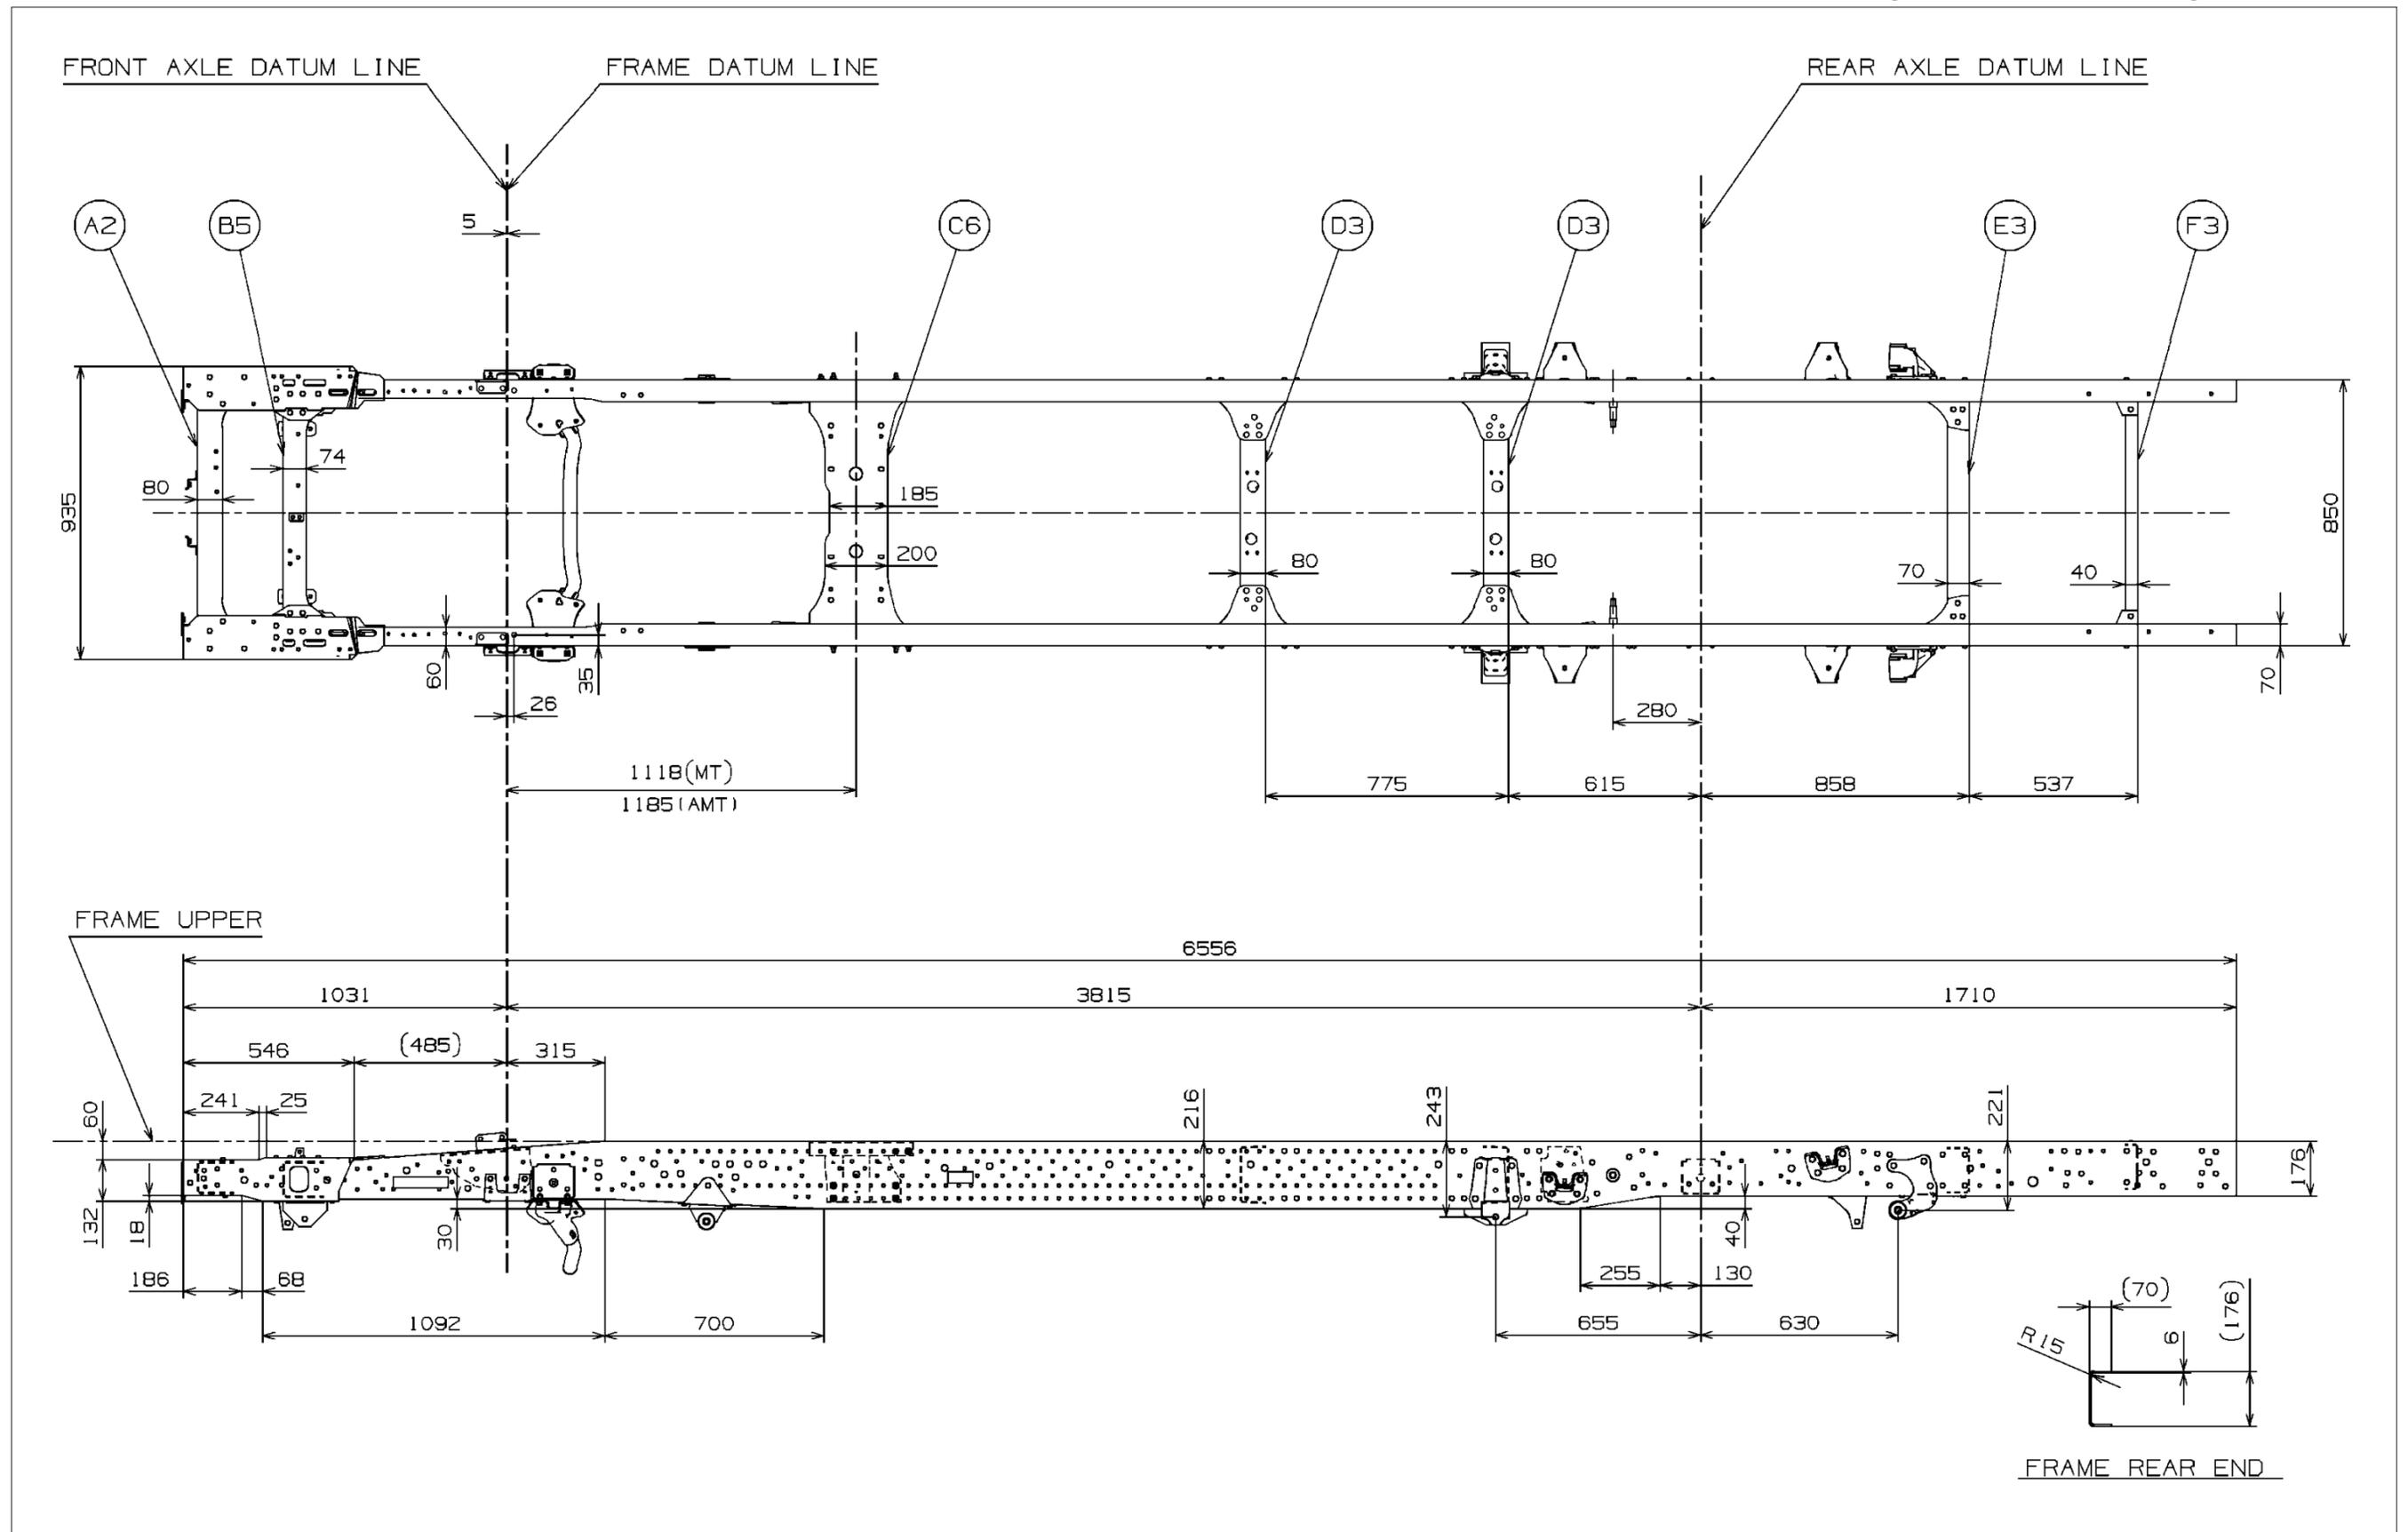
Chassis Frame Drawing NPR75L/U-ML5VAYE
